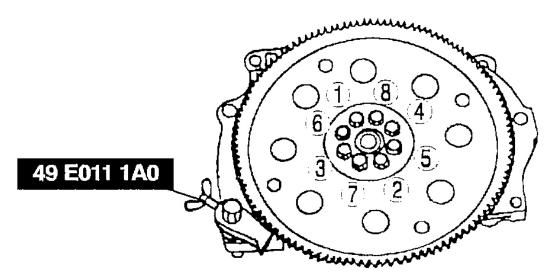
Assembling Cylinder Block Assembly (II) Courtesy of MAZDA MOTORS CORP.
